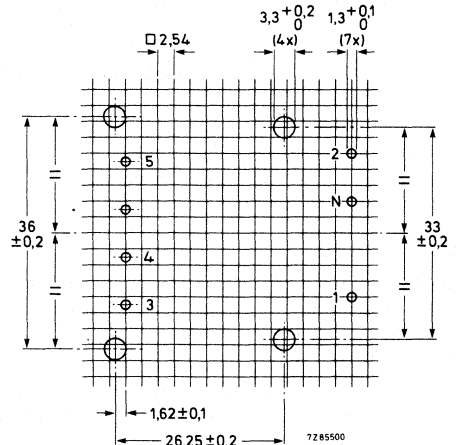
Hole pattern for mounting on a printed-wiring board, viewed from solder side.
